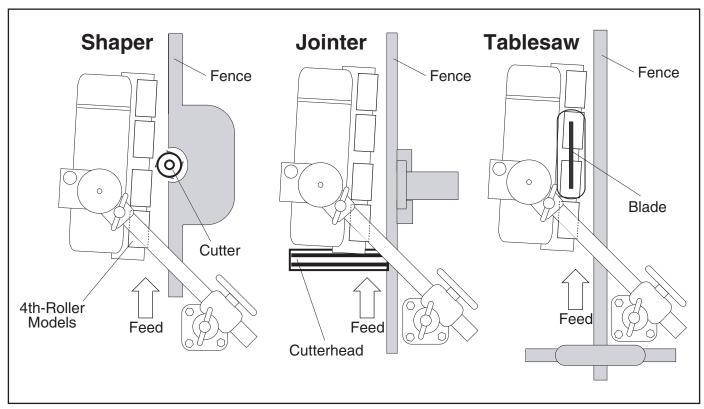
Typical power feed mounting on a shaper, jointer, and tablesaw.
